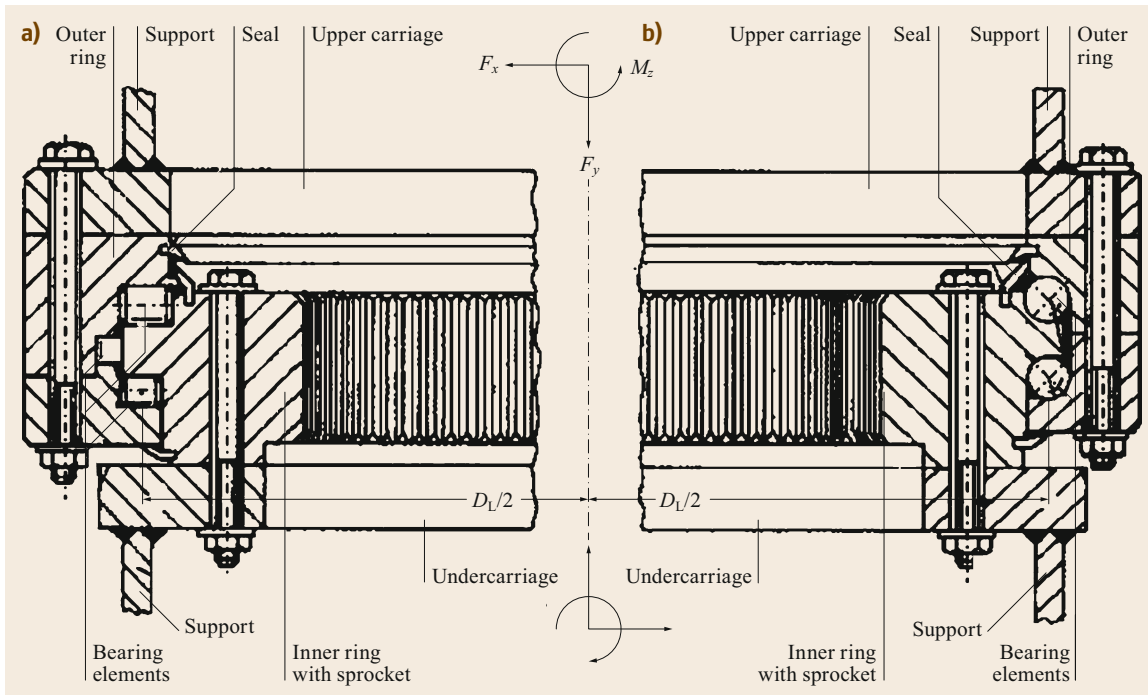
,b Slewing bearing (Hoesch Rothe Erde): (a) three-row roller slewing bearing, (b) two-row ball slewing bearing [20.5]
